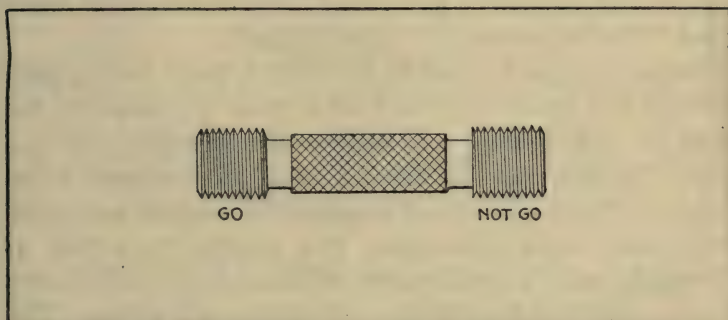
STANDARD TYPE OF MALE THREAD GAUGE
